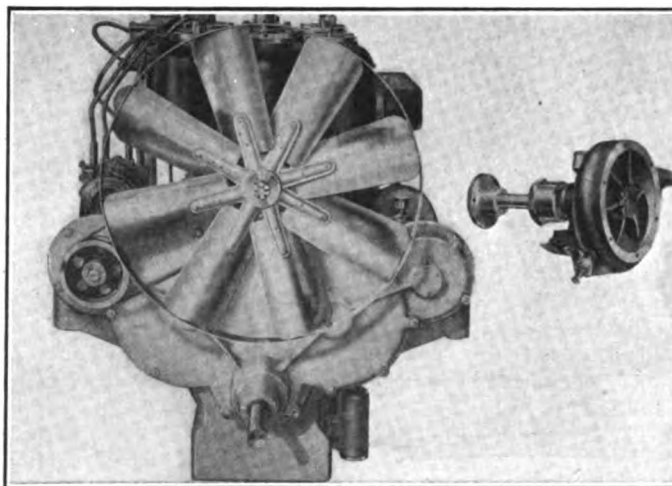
Front end view of the Mark 85 motor, presenting a large fan and a neat appearance
